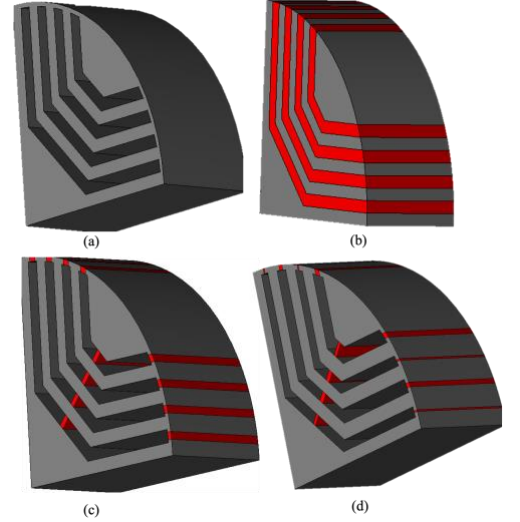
Geometrical design of demonstrator machines: (a) conventional rotor (b) radially laminated AM rotor (c) initial MMAM rotor (d) optimized MMAM rotor
